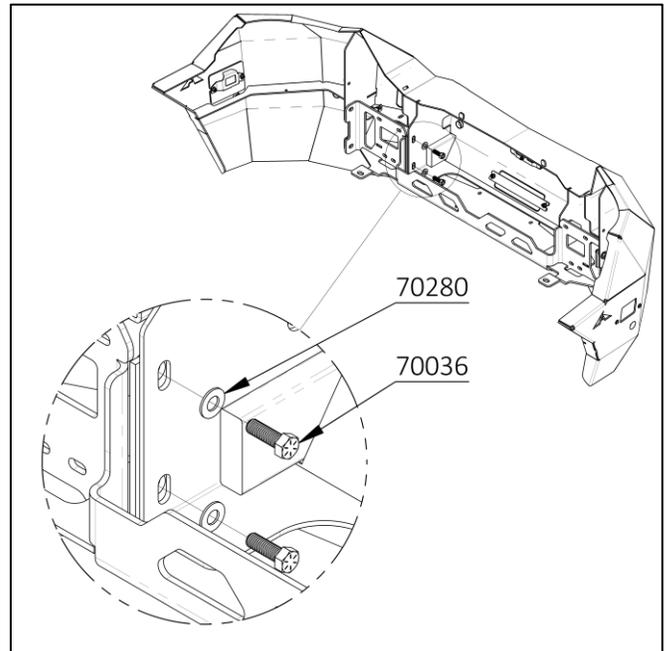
Inner Winch Cradle Install (1/2" Fasteners)
